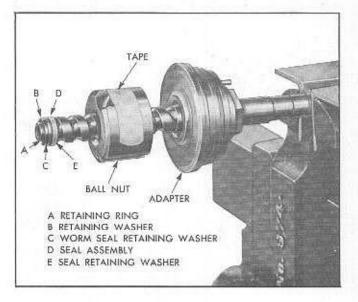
Worm Shaft, Seal and Washers Installed
